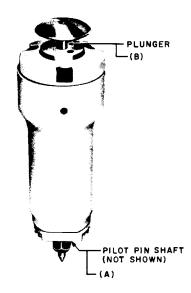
Hole-Enlarging Control Unit — 659B, 659C, 659E, and 659F Tools
